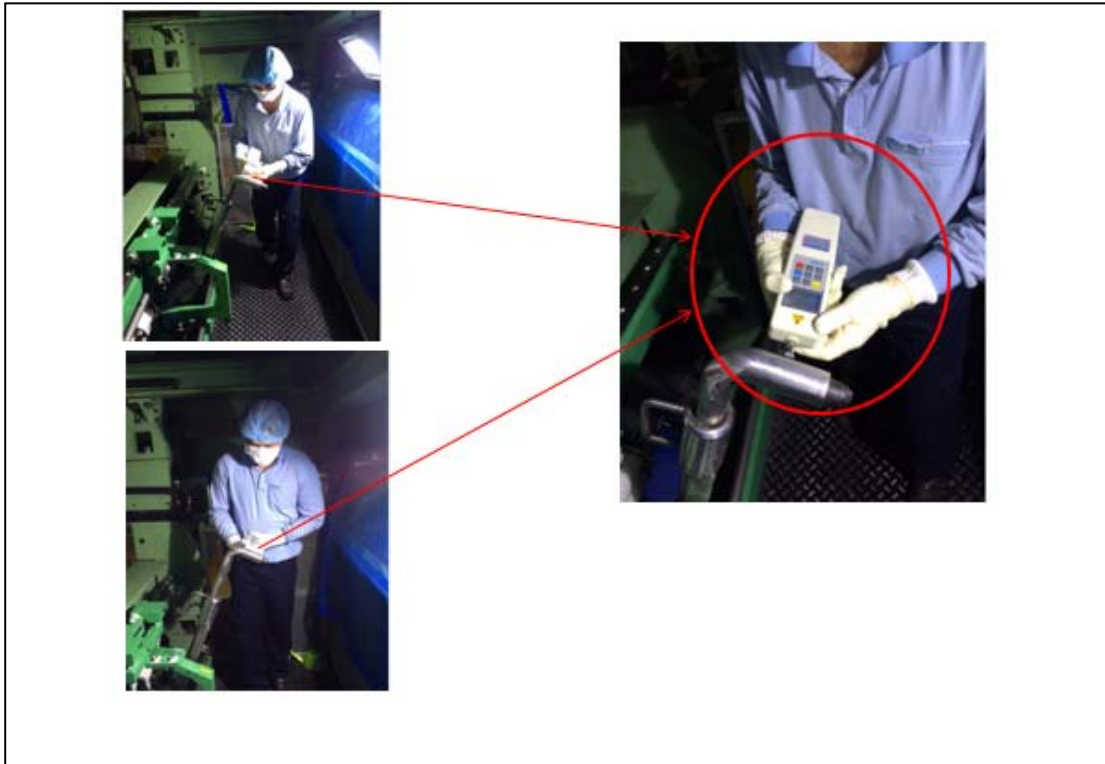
The positions of a digital force gauge for measuring force of posture 3: post- installing hot roller cleaning.
